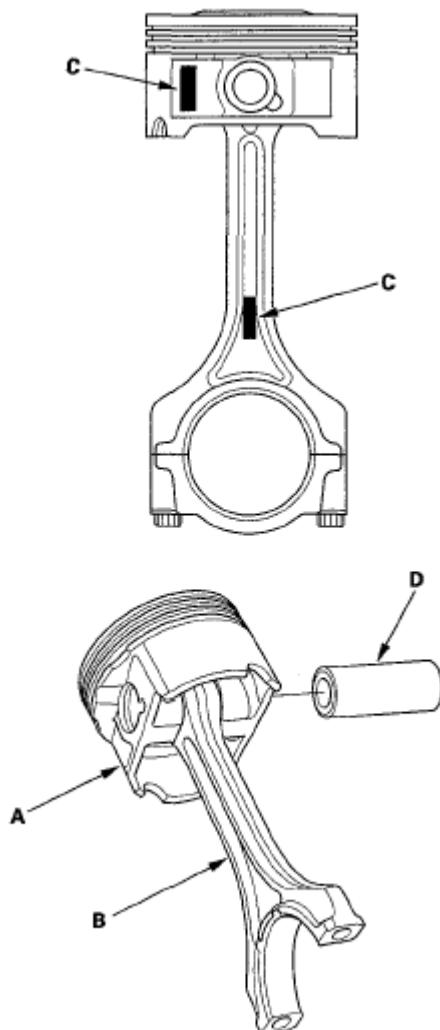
Identifying Piston, Piston Pin And Connecting Rod
